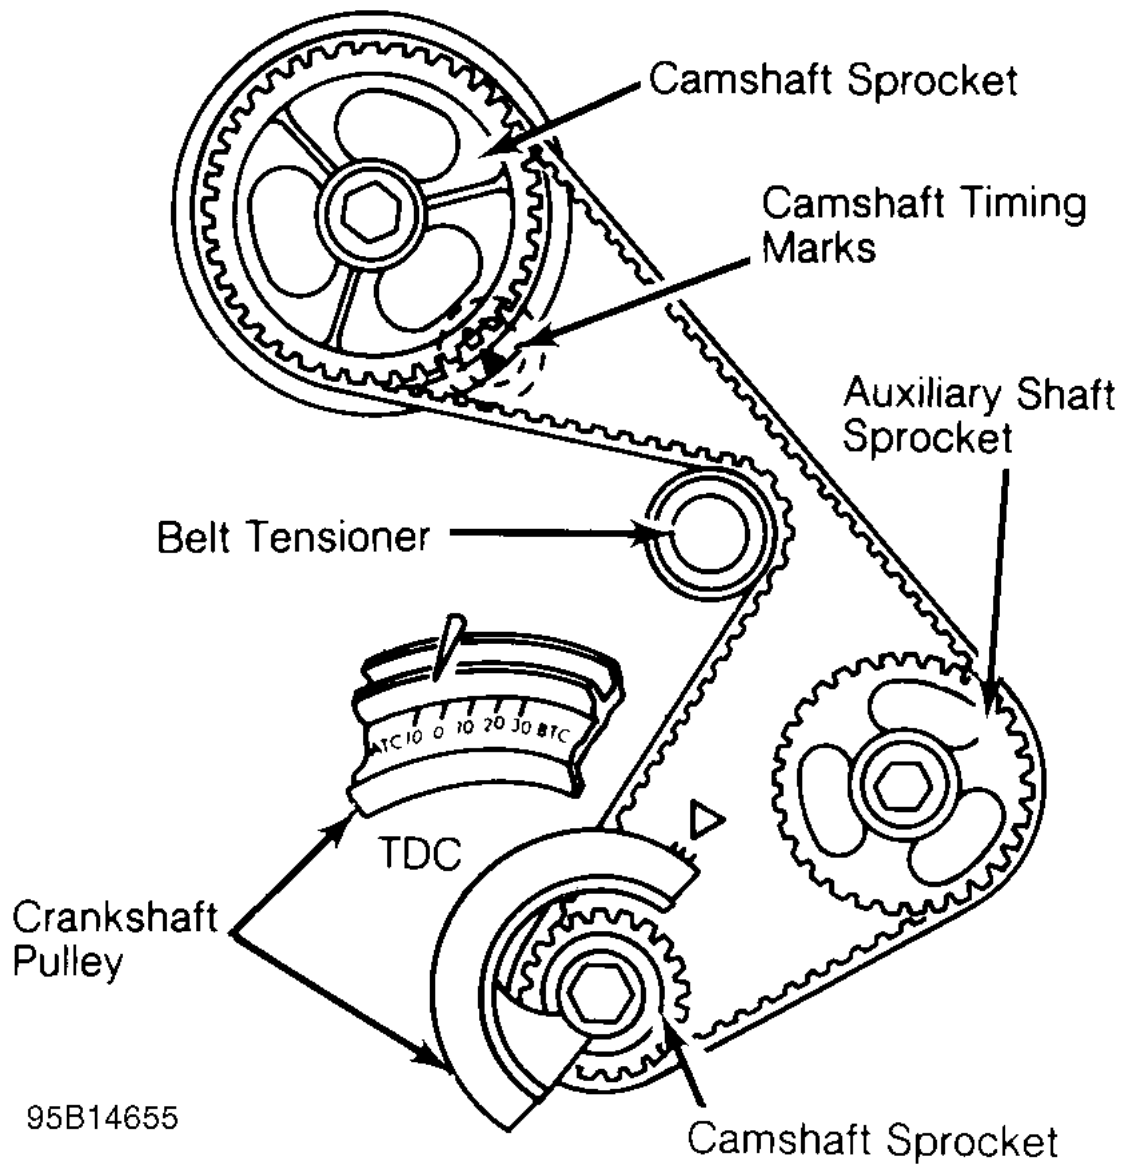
Typical Camshaft Belt Sprocket Alignment
